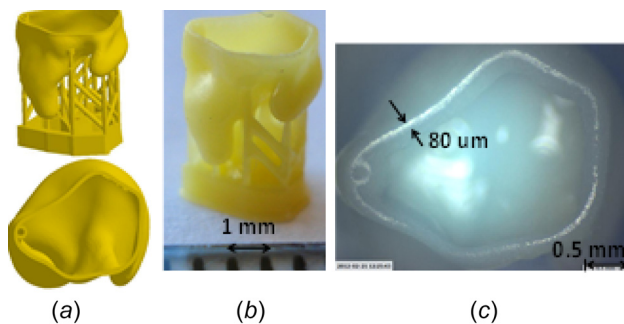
A hearing-aid: (a) CAD model with added supports; (b) built physical object; and (c) microscopic image of the built part (top view)
